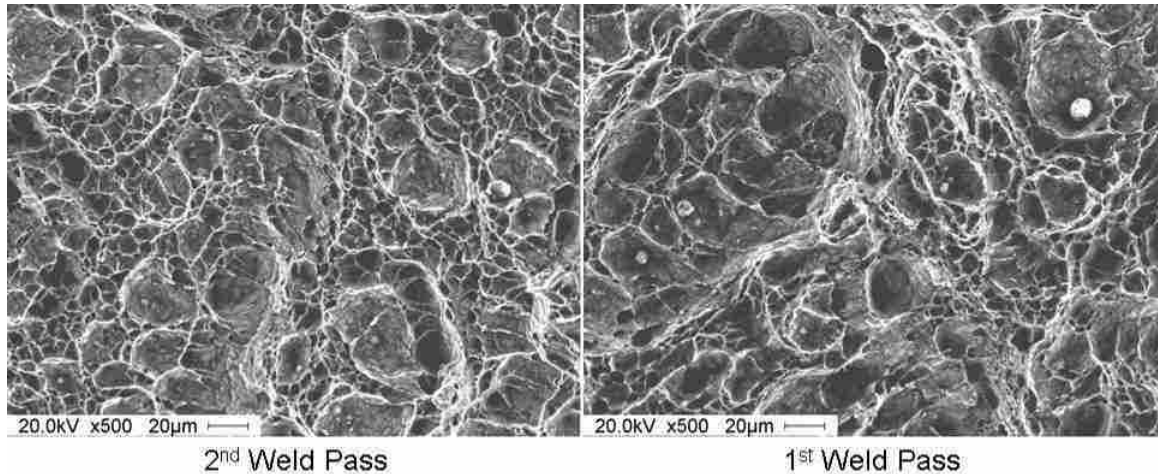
Weld centerline fractographs comparing deformation dimples of weld passes (500x).
